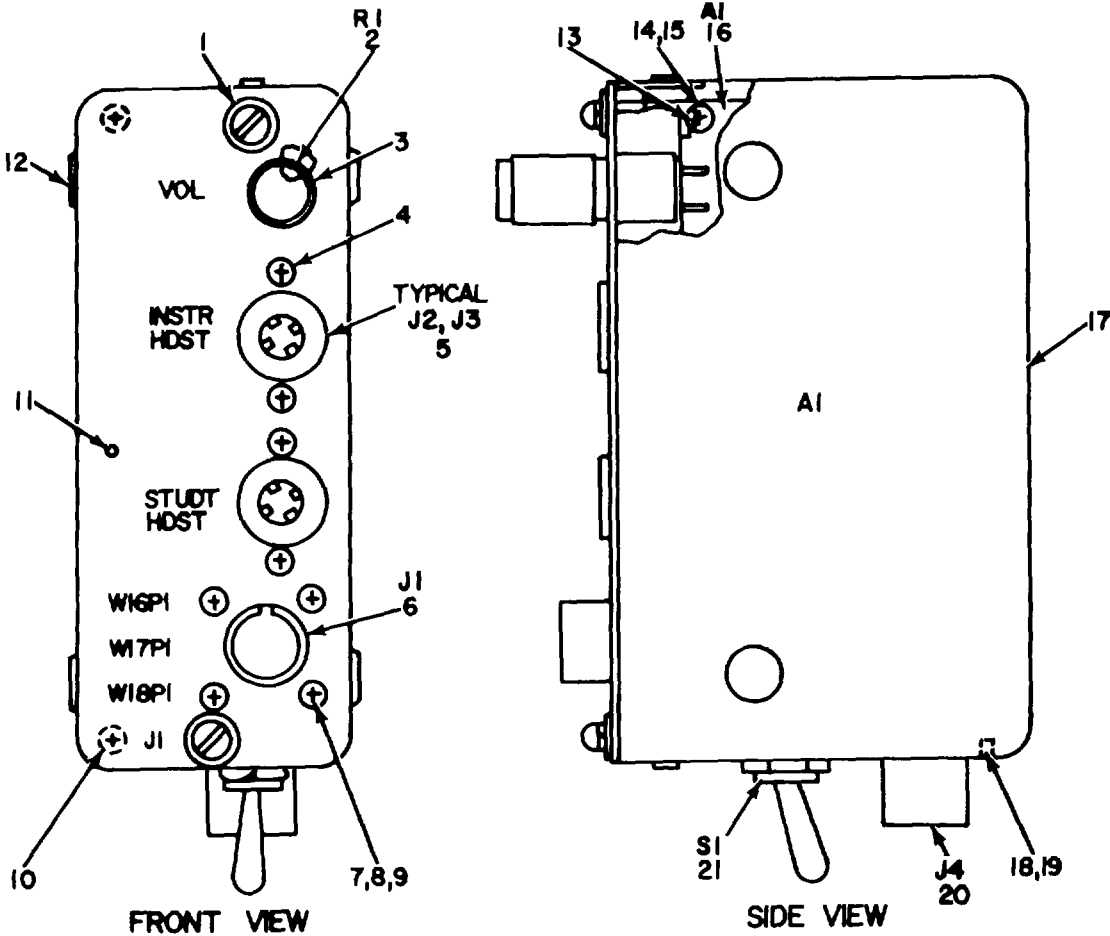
© Target Module Assembly (Sheet 3 of 3).
